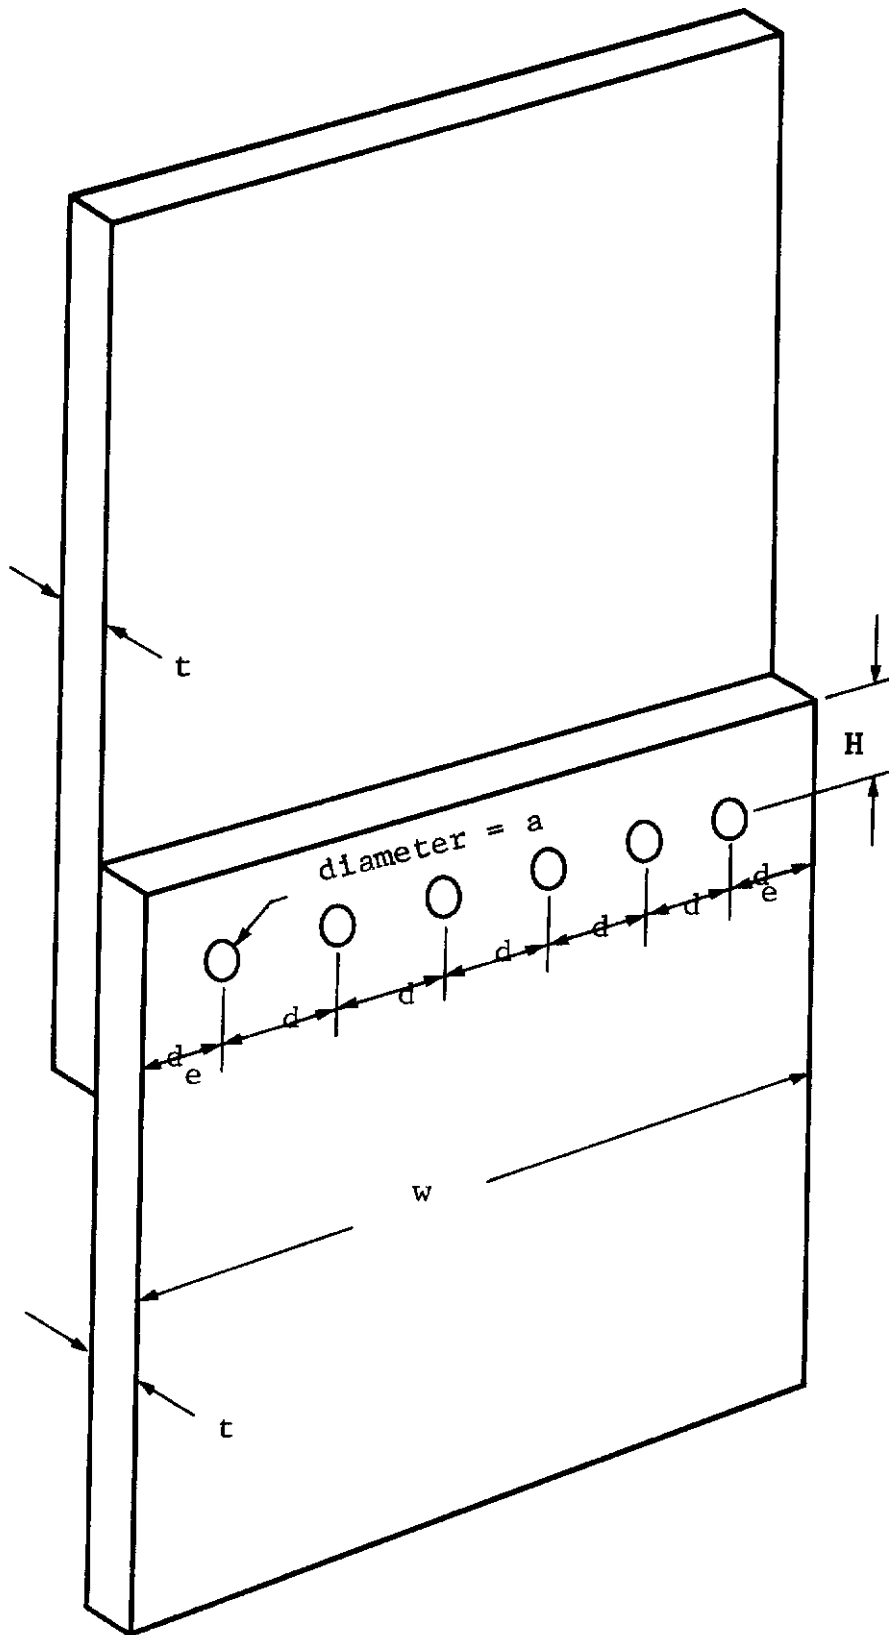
TYPICAL BOLTED OR RIVETED SINGLE-LAP JOINT
